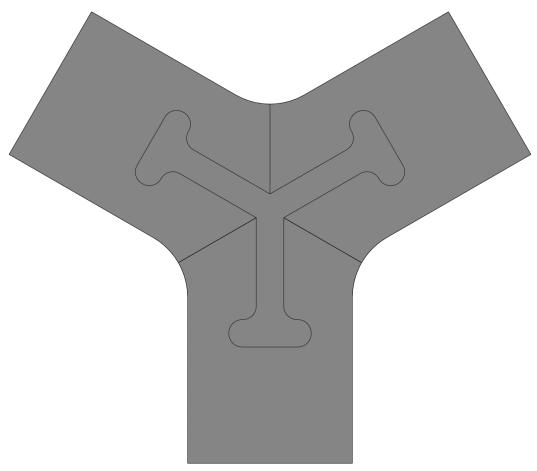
Planar section of the failed compression test on  $v3.2\,$
